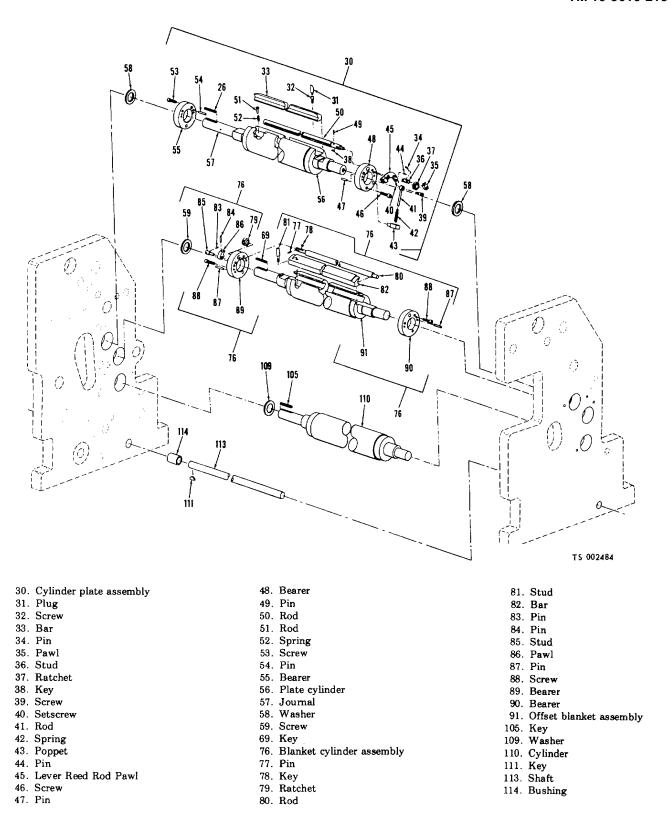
Cylinder and main drive assembly (Sheet 3 of 5).
